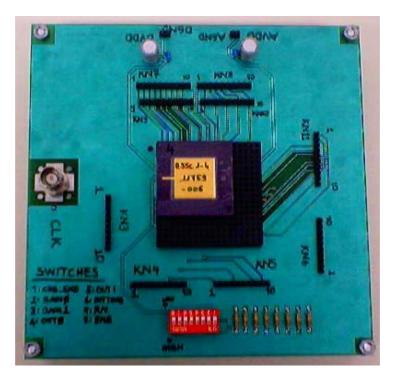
Two-layer PCB designed for the electrical tests of the  $64 \times 64$  FPA placed in a PGA-120 package<sup>\*</sup>. All the input, output, and power pins of the PGA-120 package are routed to the sides of the PCB and connected to the connectors for testing purposes. There is a switch circuitry on the PCB to apply digital control inputs to set some FPA features such as gain and integration time.
